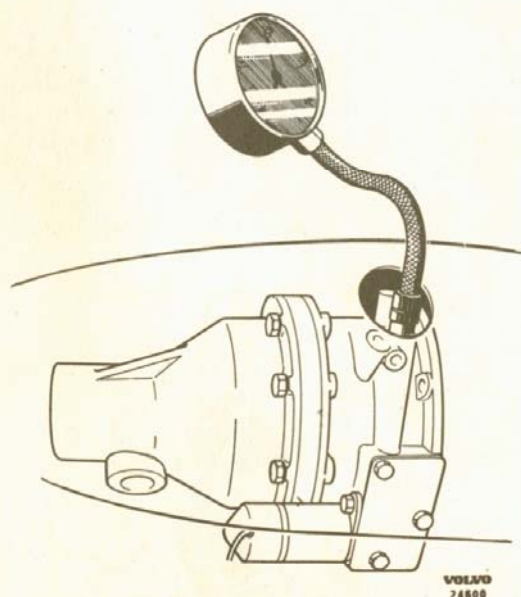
Checking oil pressure with pressure gauge SVO 2415
